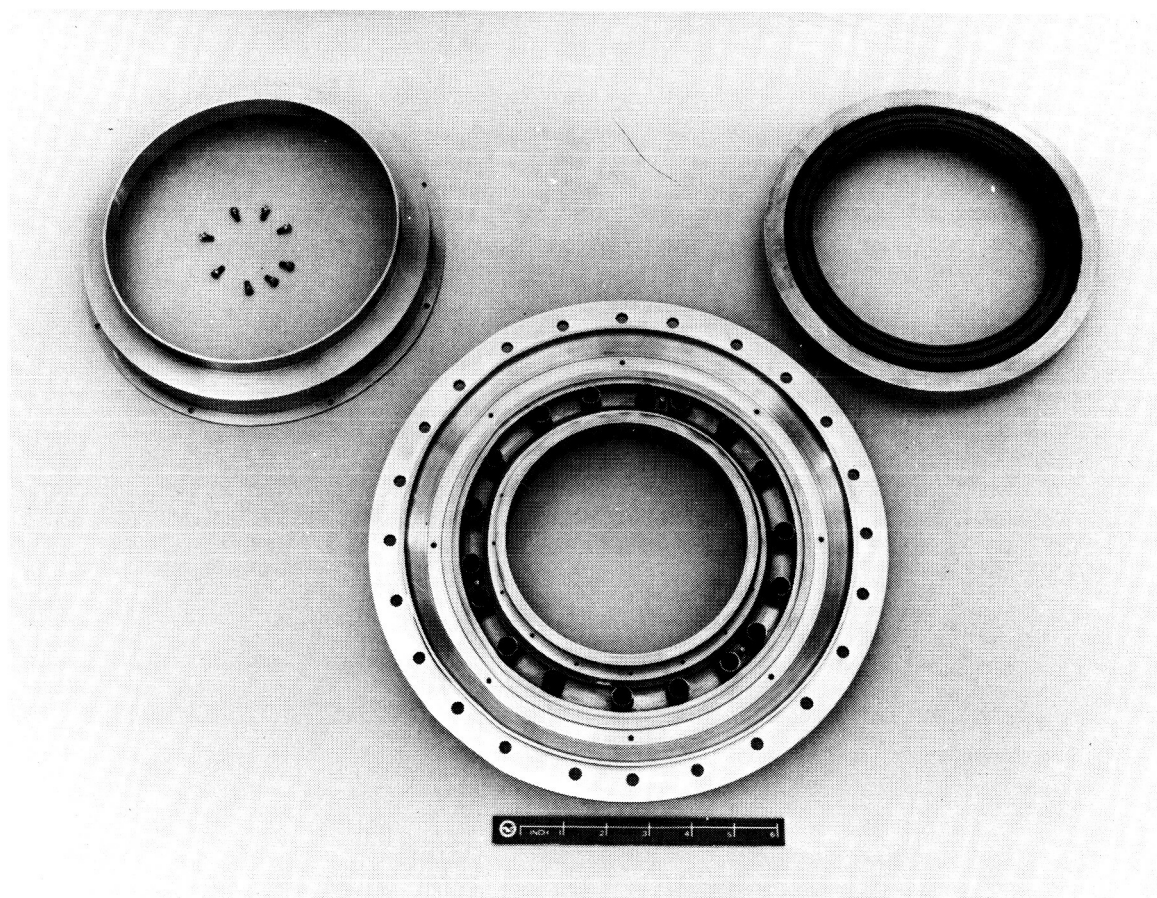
Component Parts of Externally Pressurized Orifice-Compensated Hydrostatic Face Seal Assembly CN-7466
